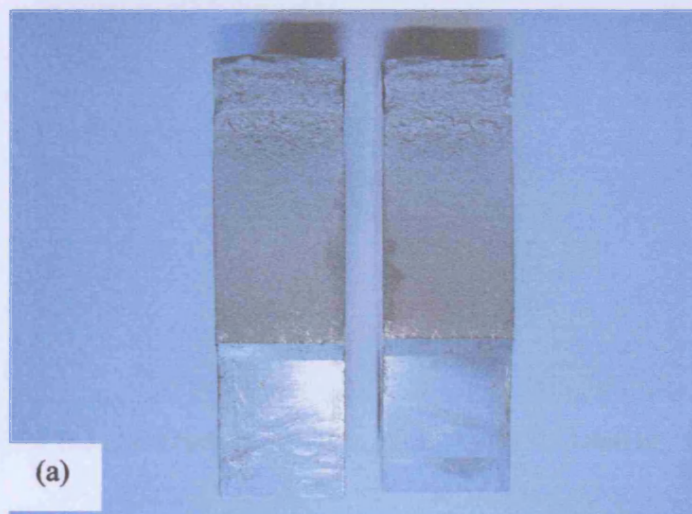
(a): Fracture surfaces of Test CT 1.
